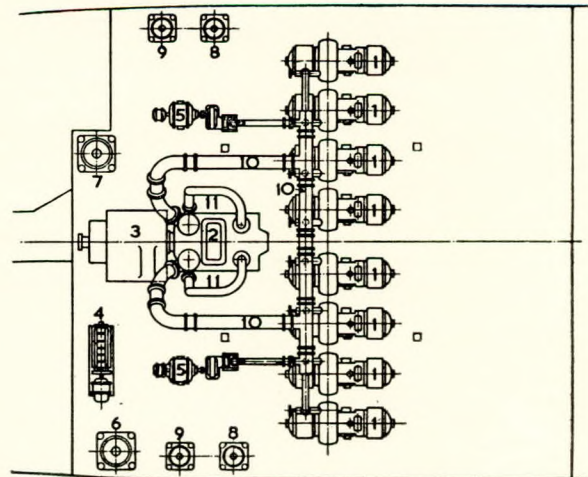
Free-piston gas generator and turbine propulsion equipment; power 8,000 h.p.
